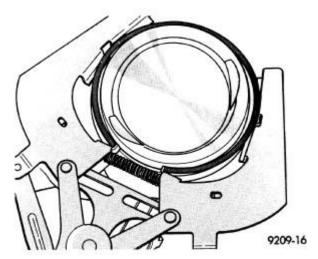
Piston Rings Courtesy of CHRYSLER LLC
